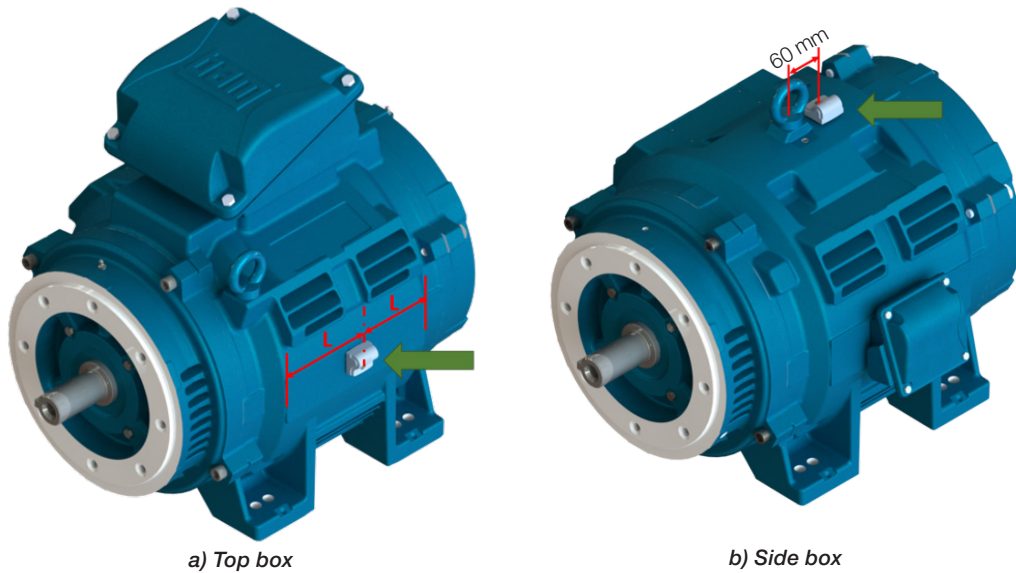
Place to install the WEG Motor Scan on W40 motors, frames IEC160 to 280S/M
